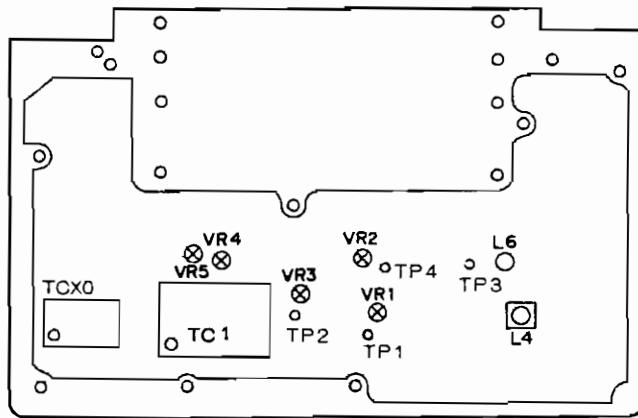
1200 MHz band adjustment: Component layout (upper view)
